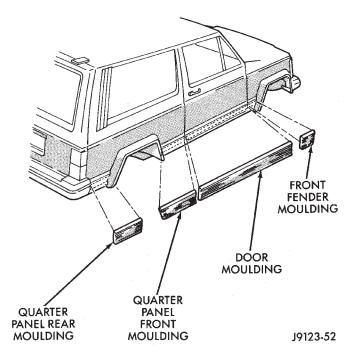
Body Side Moulding—2-Door XJ Vehicles
